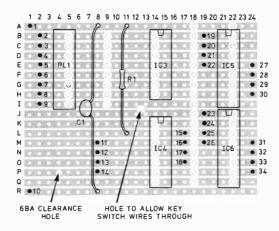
Component layout for Veroboard to be mounted inside the calculator case
